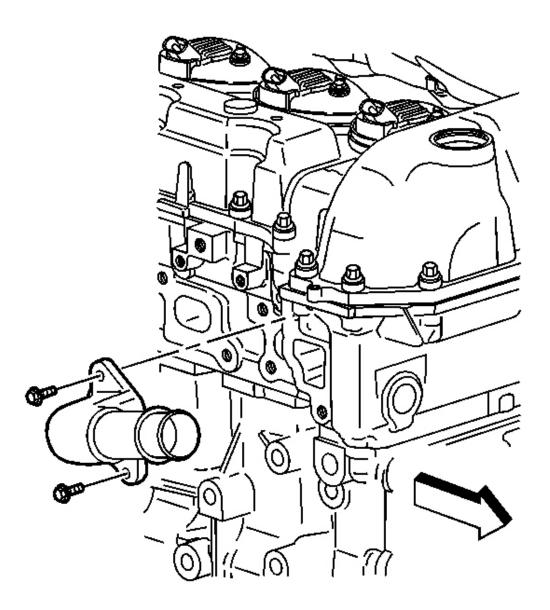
View Of Water Outlet Courtesy of GENERAL MOTORS CORP.
